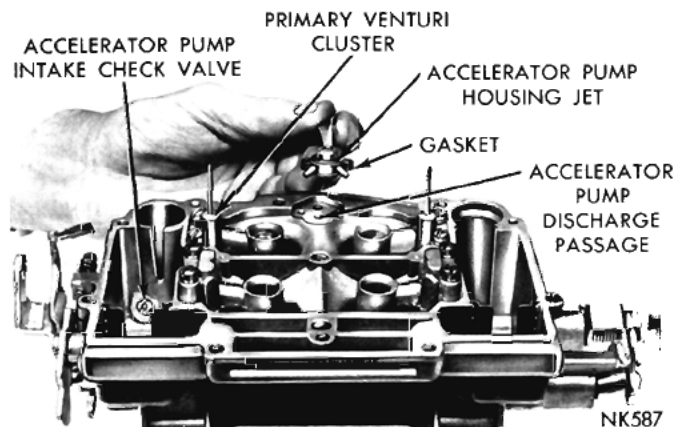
Removing or Installing Accelerator Pump Jet Housing
